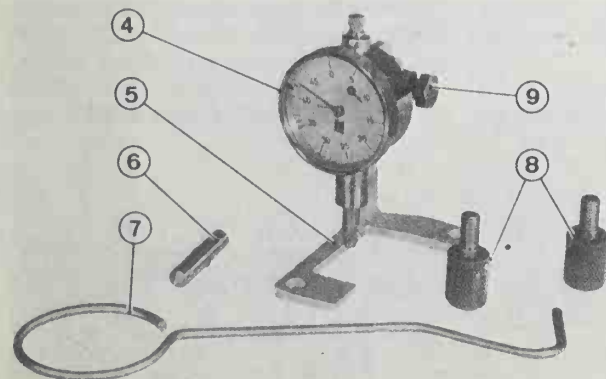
Use the tools shown to time Roto Diesel fuel injection pump as outlined in text.
